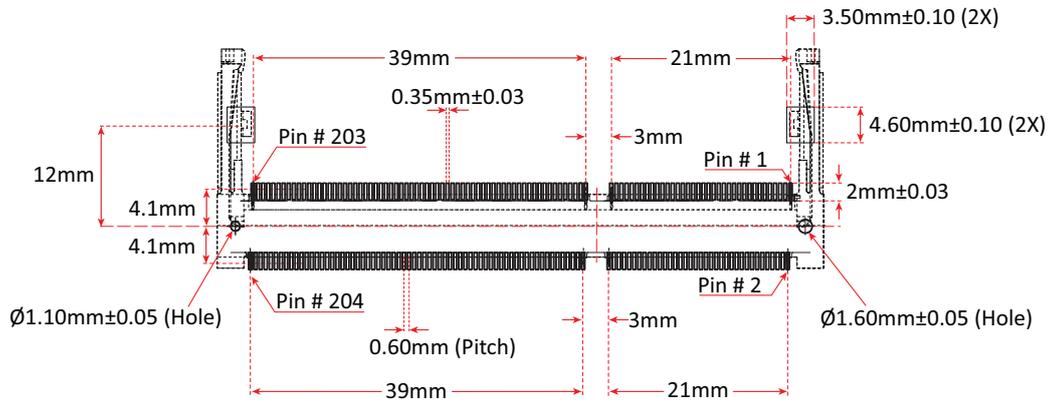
PCB footprint of the SOM DDR3 SODIMM slot
